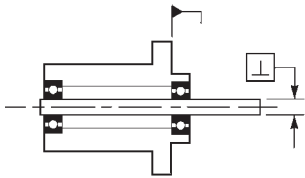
Perpendicularity of shaft axis to mounting datum
